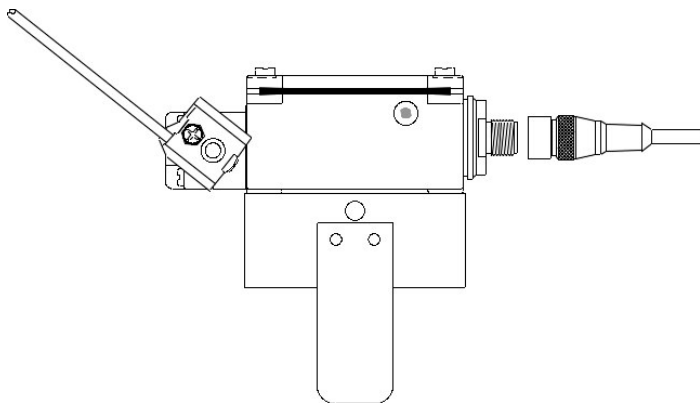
Lynx™ Mold-Closed Limit Switch side view
